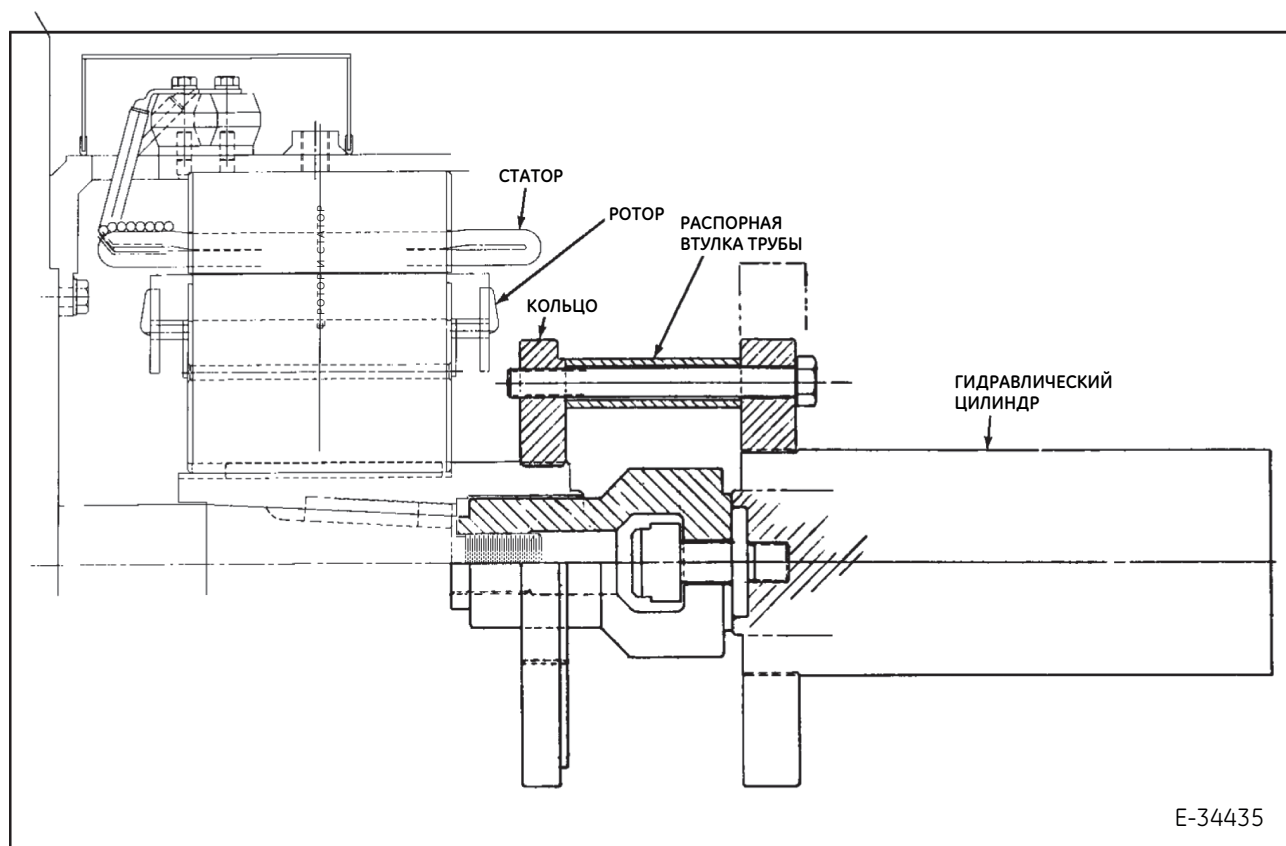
Hydraulically Remove Rotor From Air Compressor Shaft
